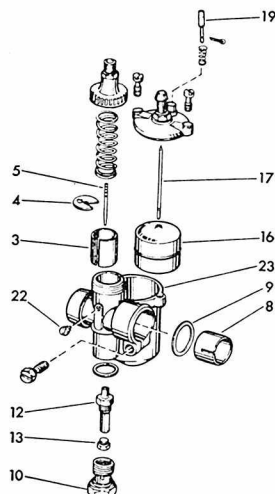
Exploded view of carburetor typical of type used on D1 model.
